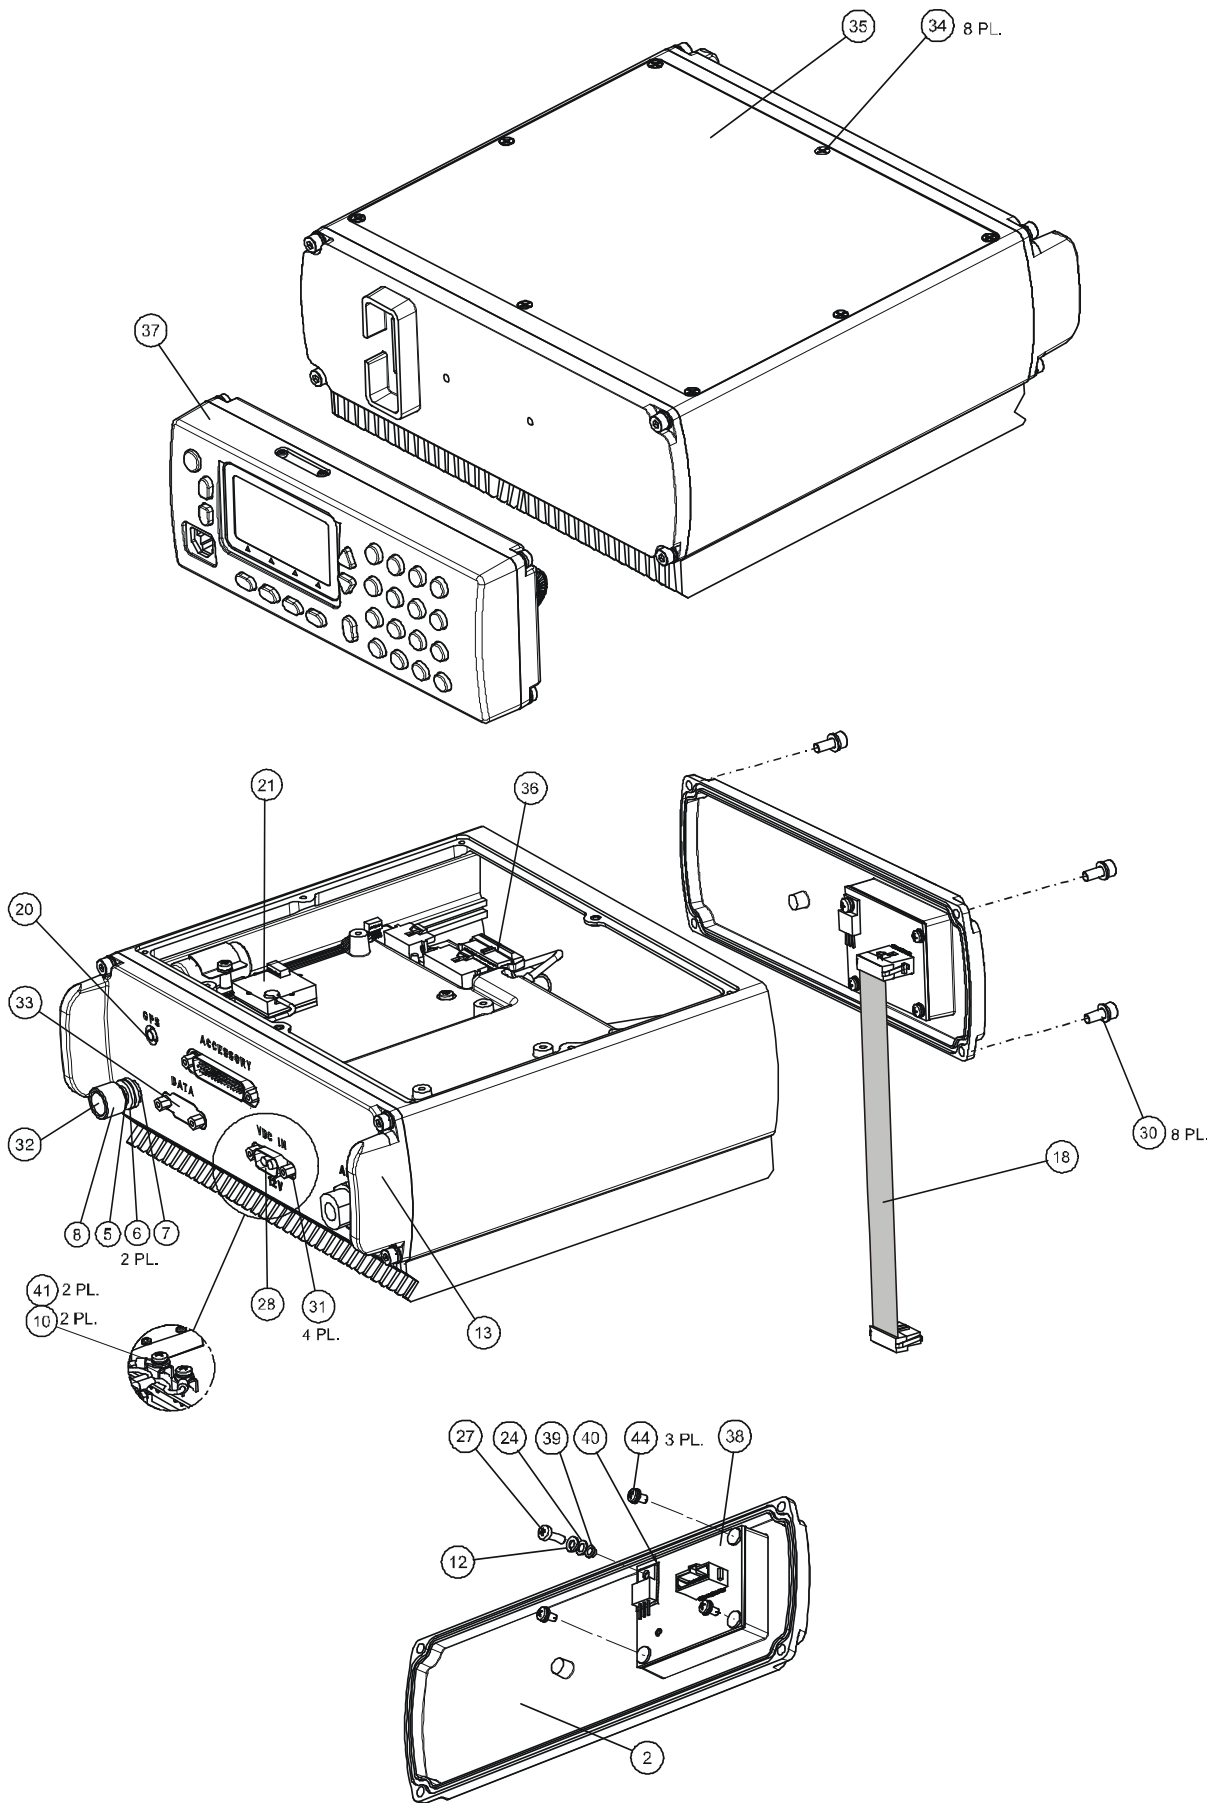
B. Micom-Z Assembly, Trunk Version (Sheet 2 of 2)
